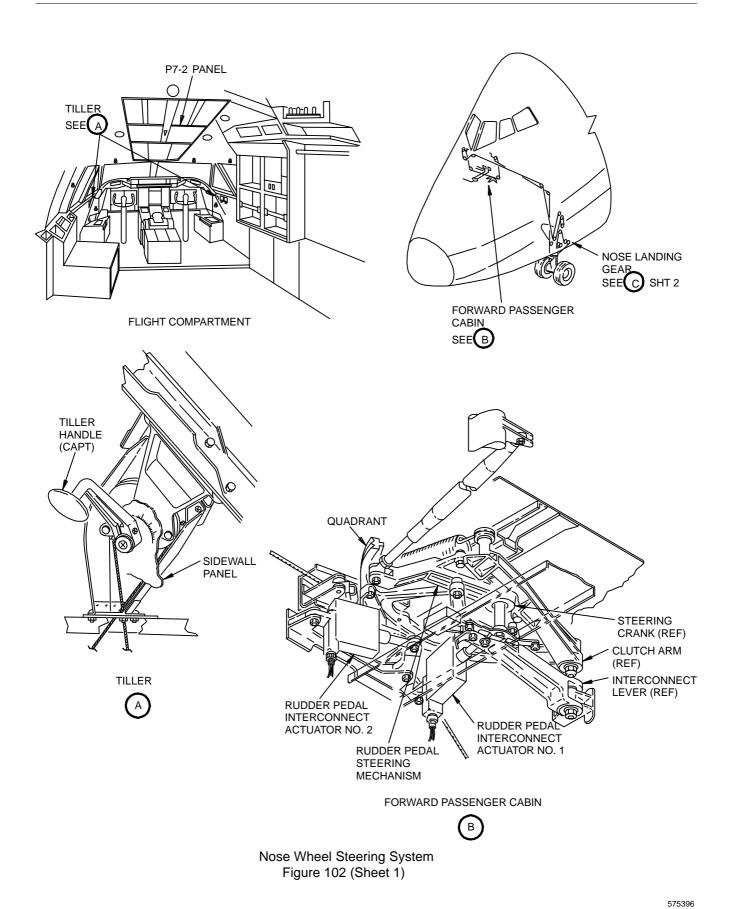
32-51 Nose Wheel Steering Sys. Comp. location Fig. 102 (Sheet 1)
